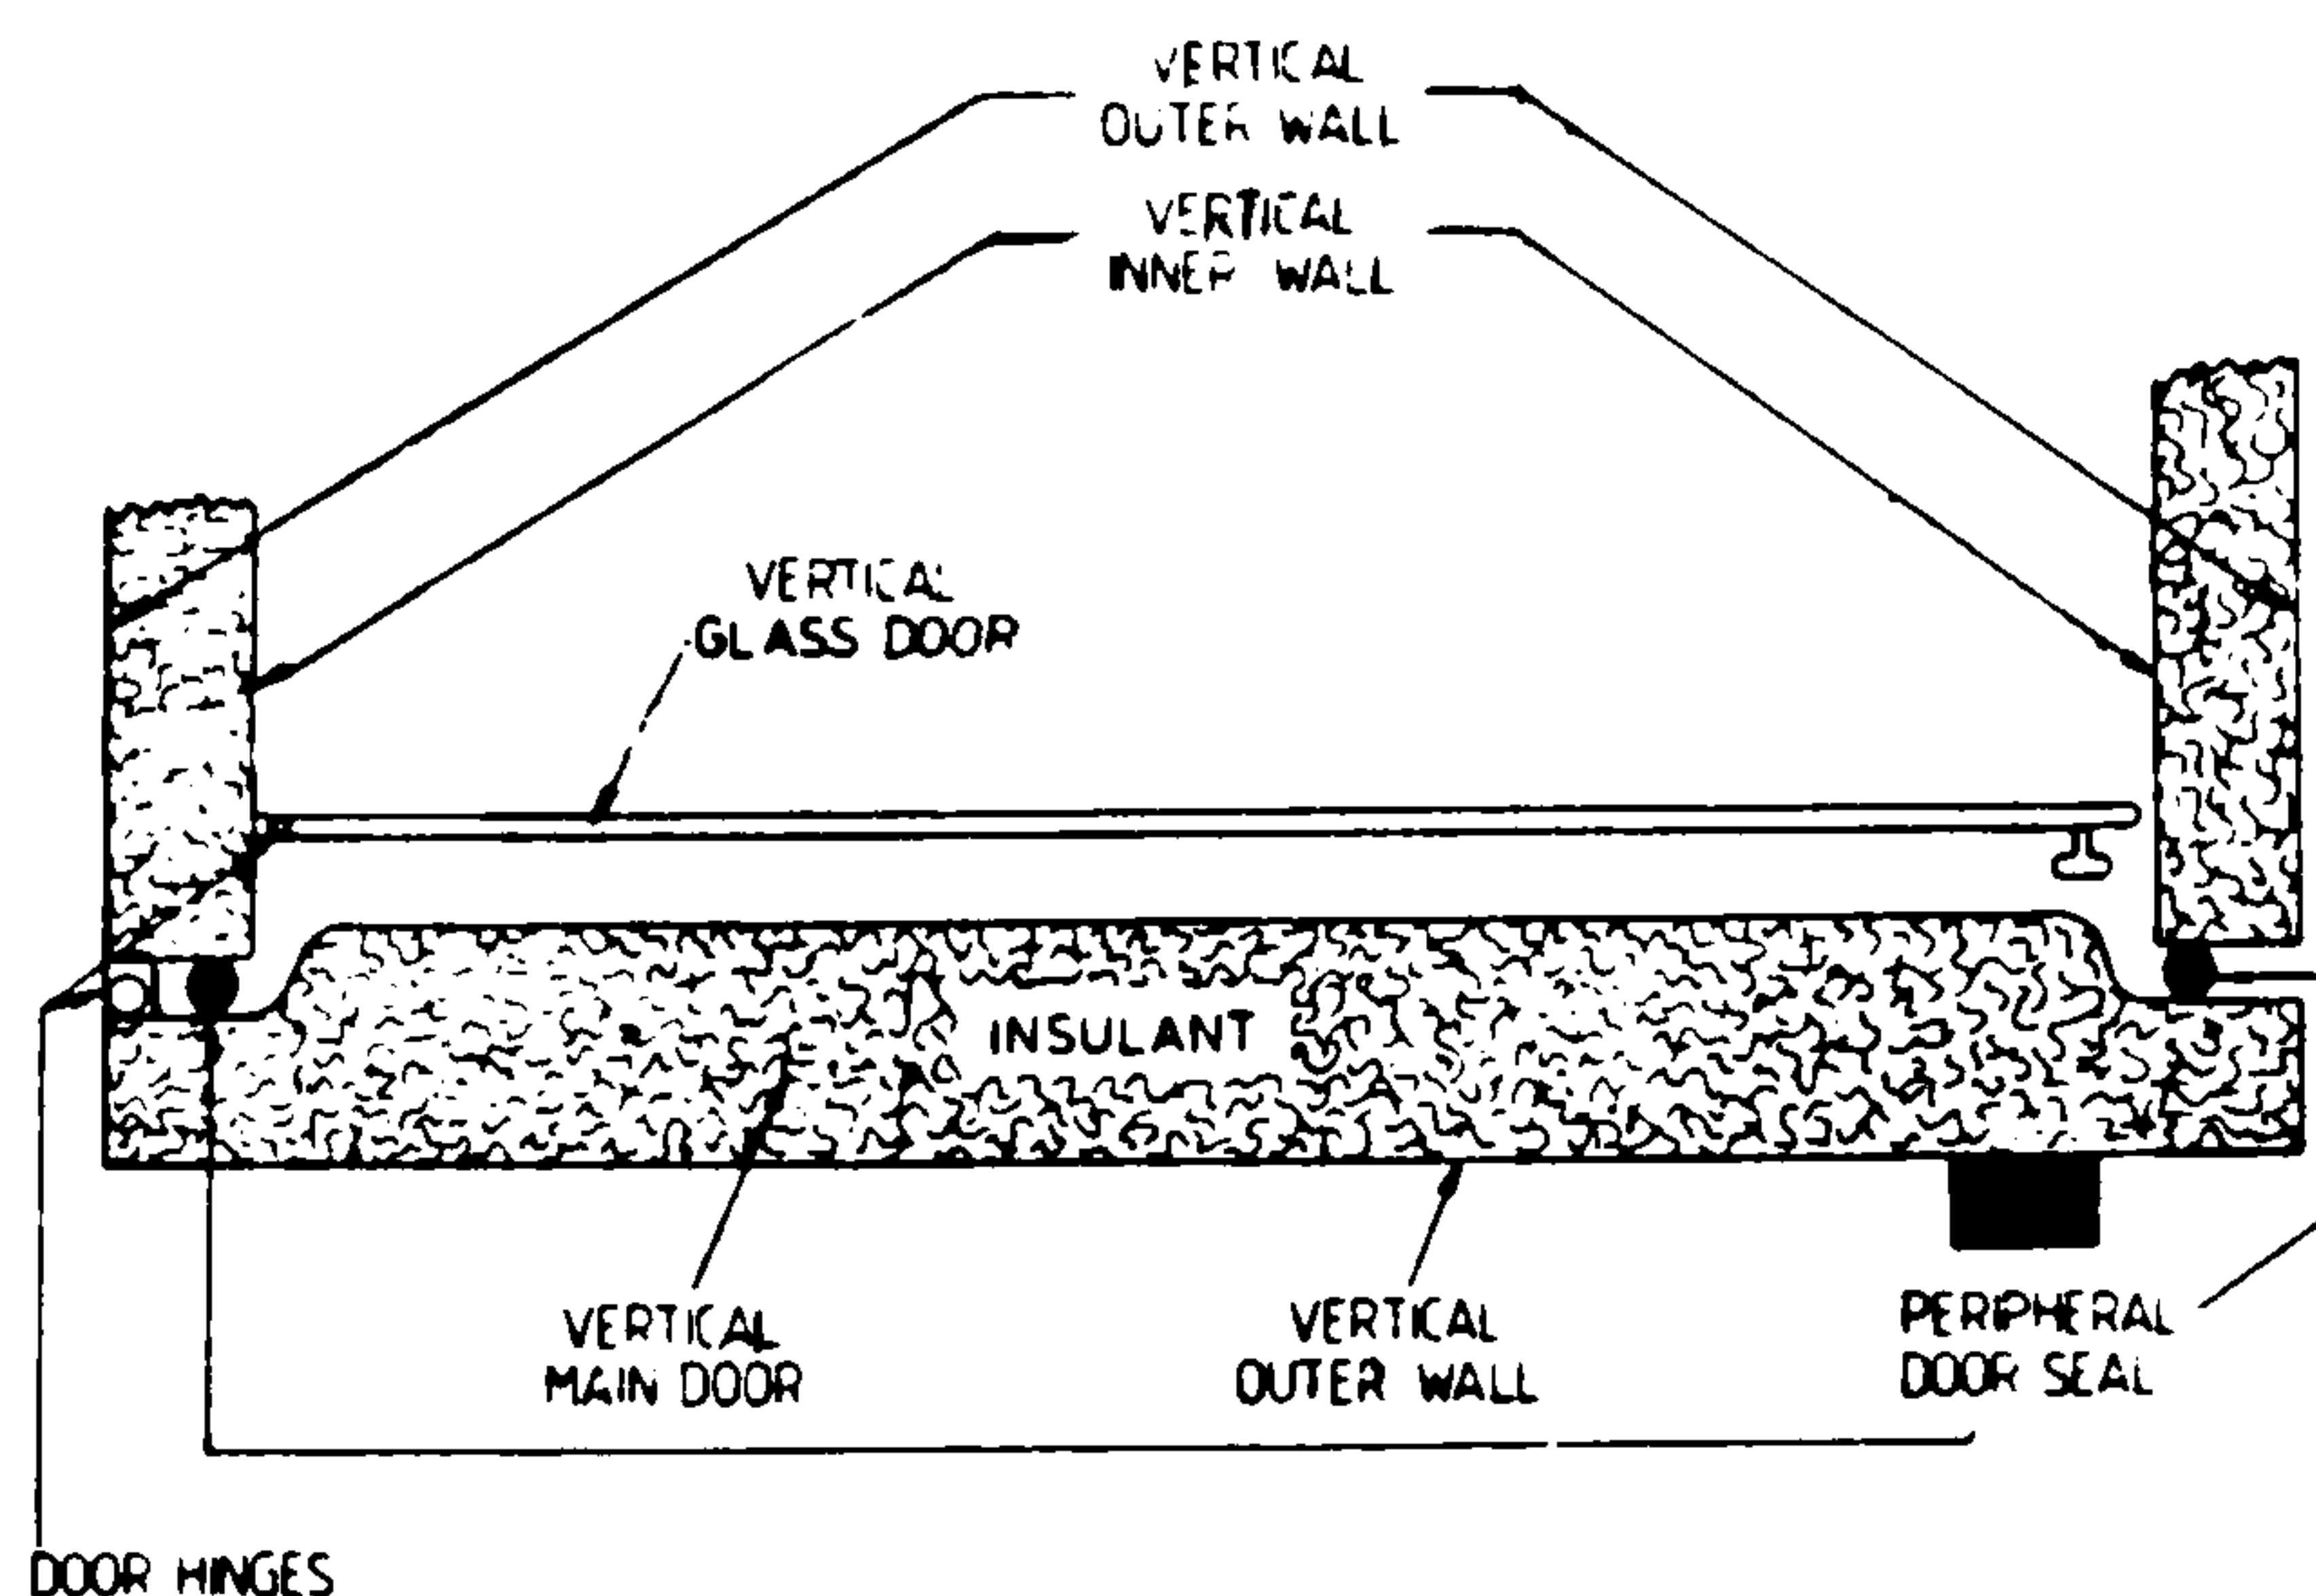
Schematic cross-sectional plan view showing the vertical doors and the door seal of a typical electric oven
